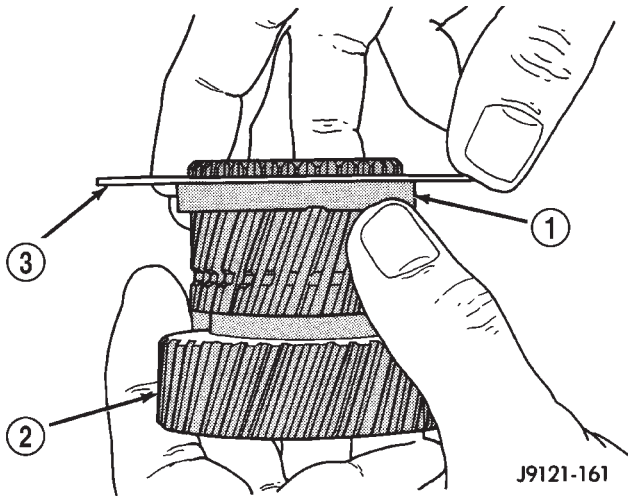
Installing Driving Shell Front Thrust Plate On Sun Gear
